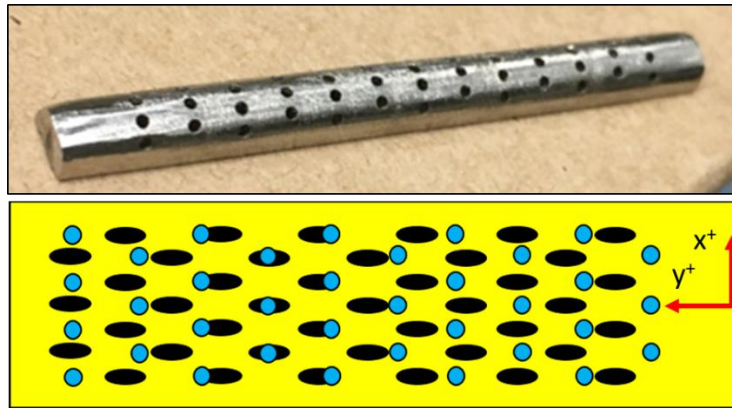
Printed impingement plate (Top) and hole alignment (Bottom).
